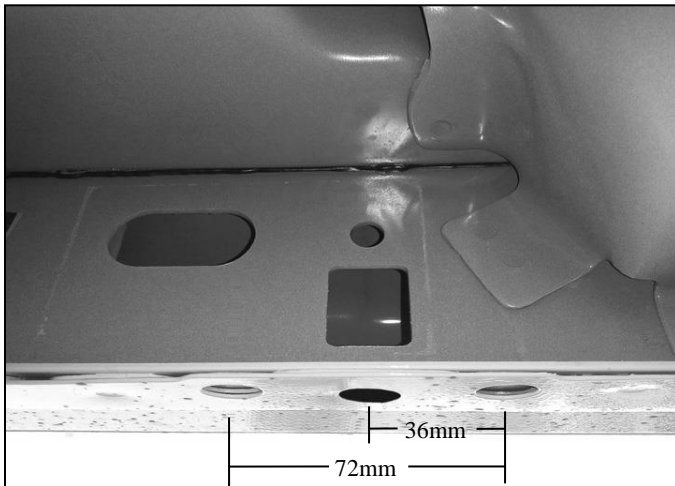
Optional: Mark to Drill for Center Bracket Mounting
